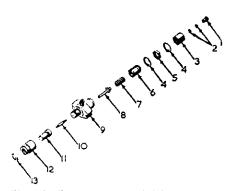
Exploded view of injector nozzle and holder. Refer to Fig. 53 for a crosssectional view.
